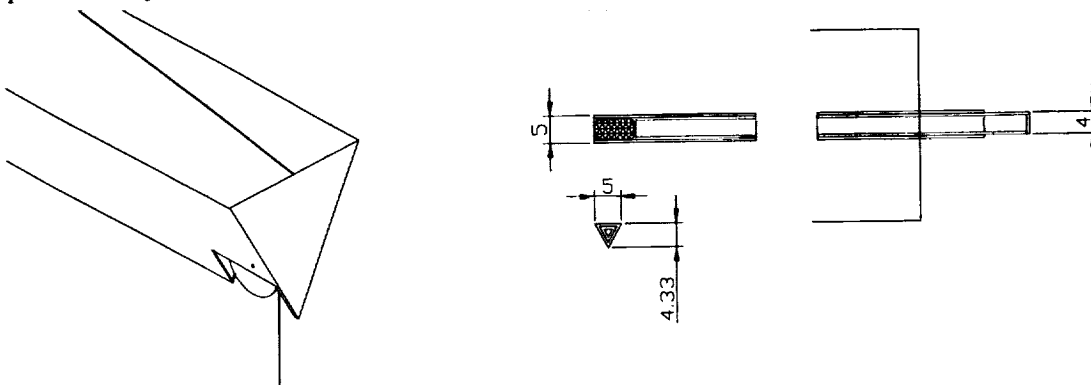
Drawing of Telescoping Boom with Cable Pulley
